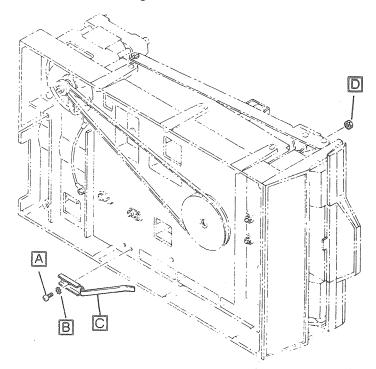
EJECT SPRINGS REMOVAL AND REPLACEMENT
